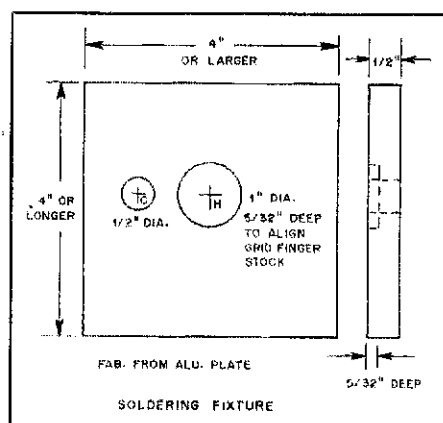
Dimensions of the soldering fixture. See Fig. 2 for more information on hole location.
